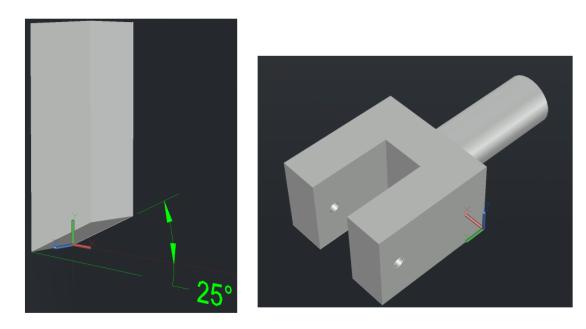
3D Design of the Locking Pin (Left) and Knob Mechanisms (Right)
